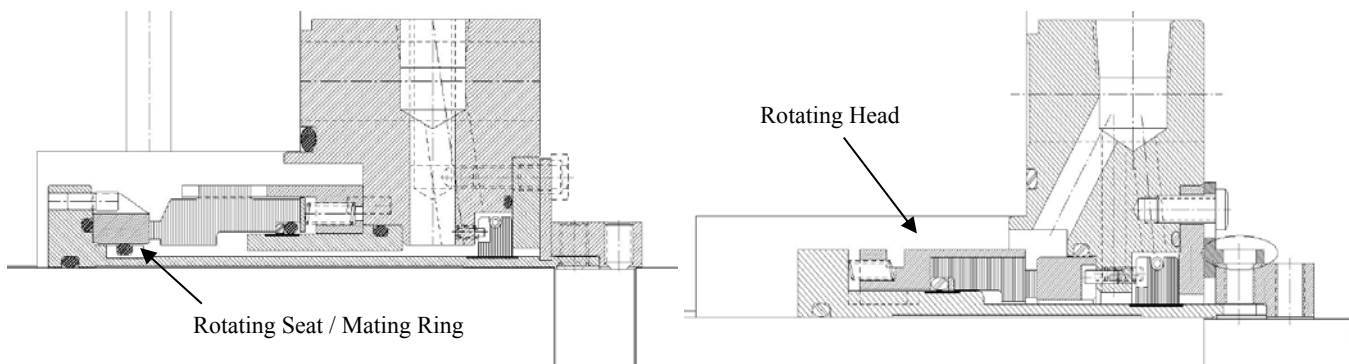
1CW-FL Type A (RS) with Piping Plan 11/65 (left); 1CW-FL Type A (Non-RS) with Piping Plan 11/65 (right)
